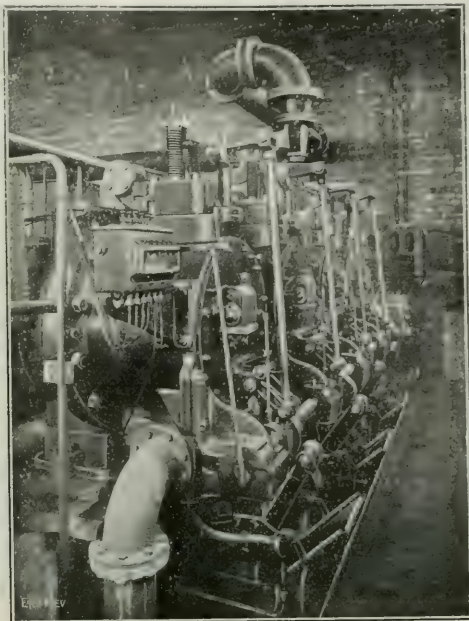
PREMIER ENGINE VALVE GEAR.
